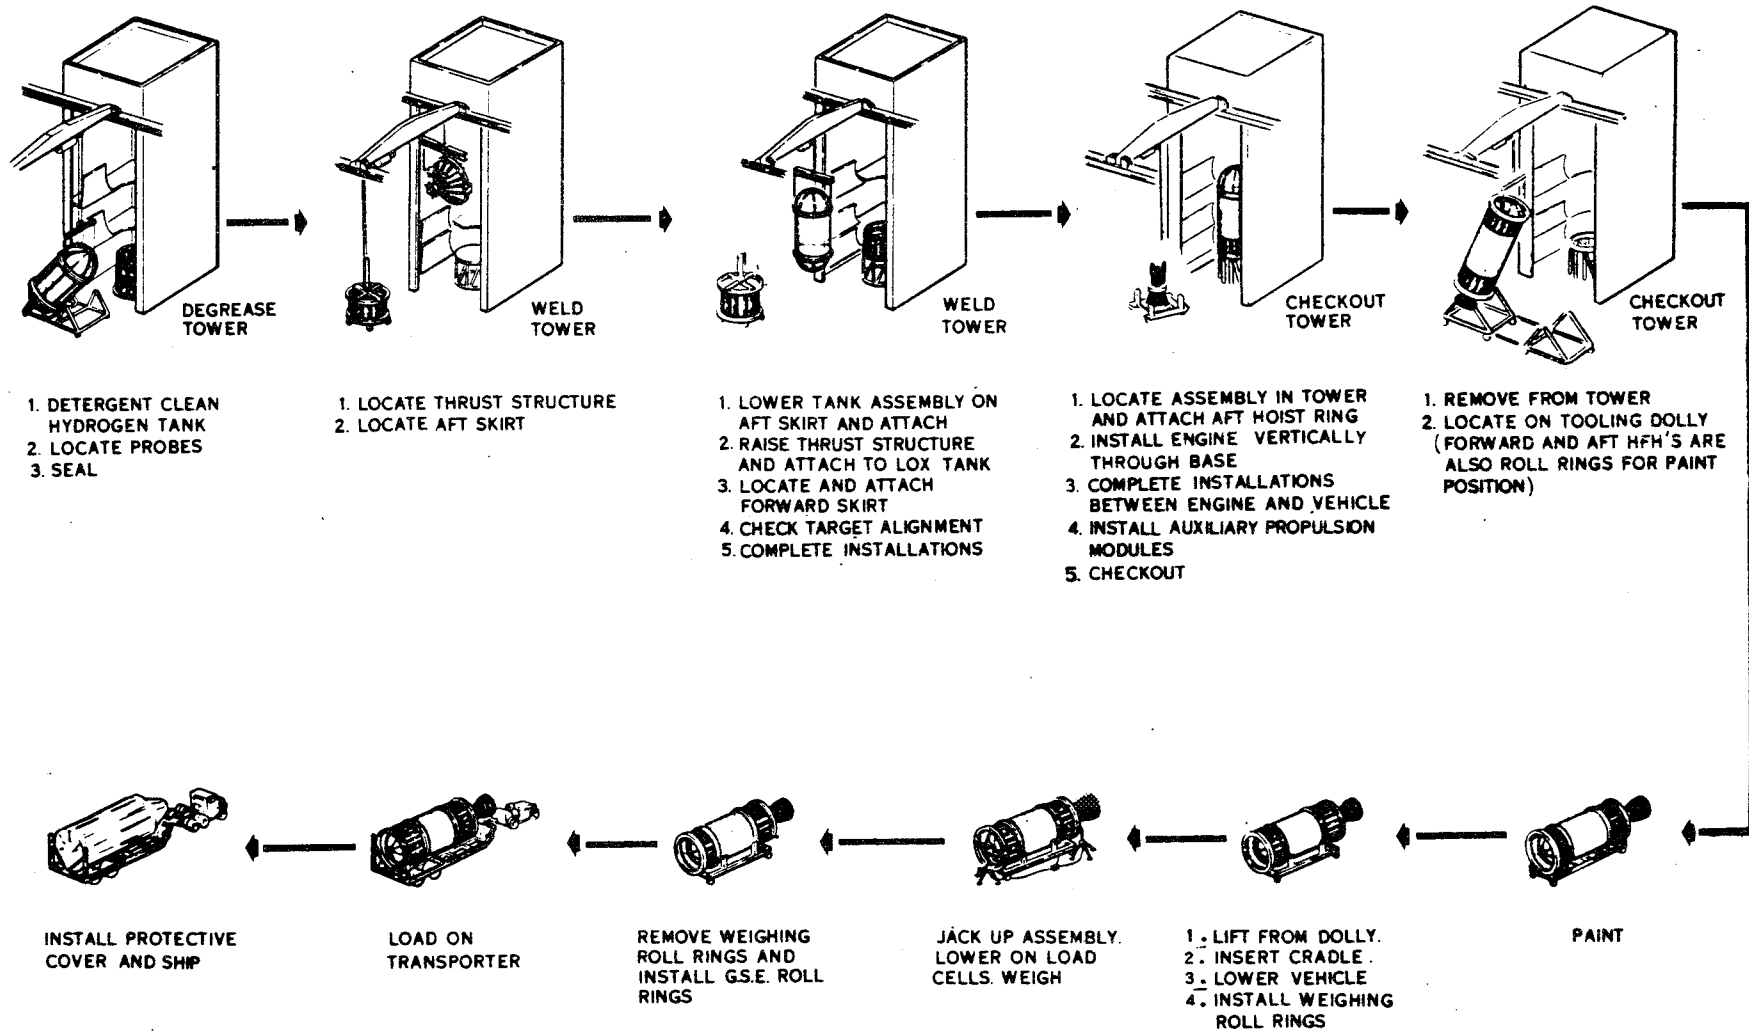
S-IVB FINAL ASSEMBLY
